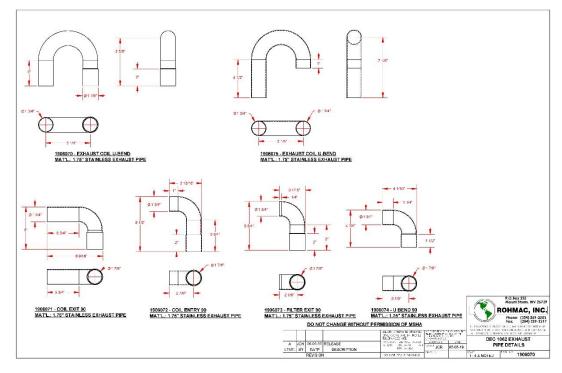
Revised Diesel Power Package Exhaust Pipe Detail Drawing
